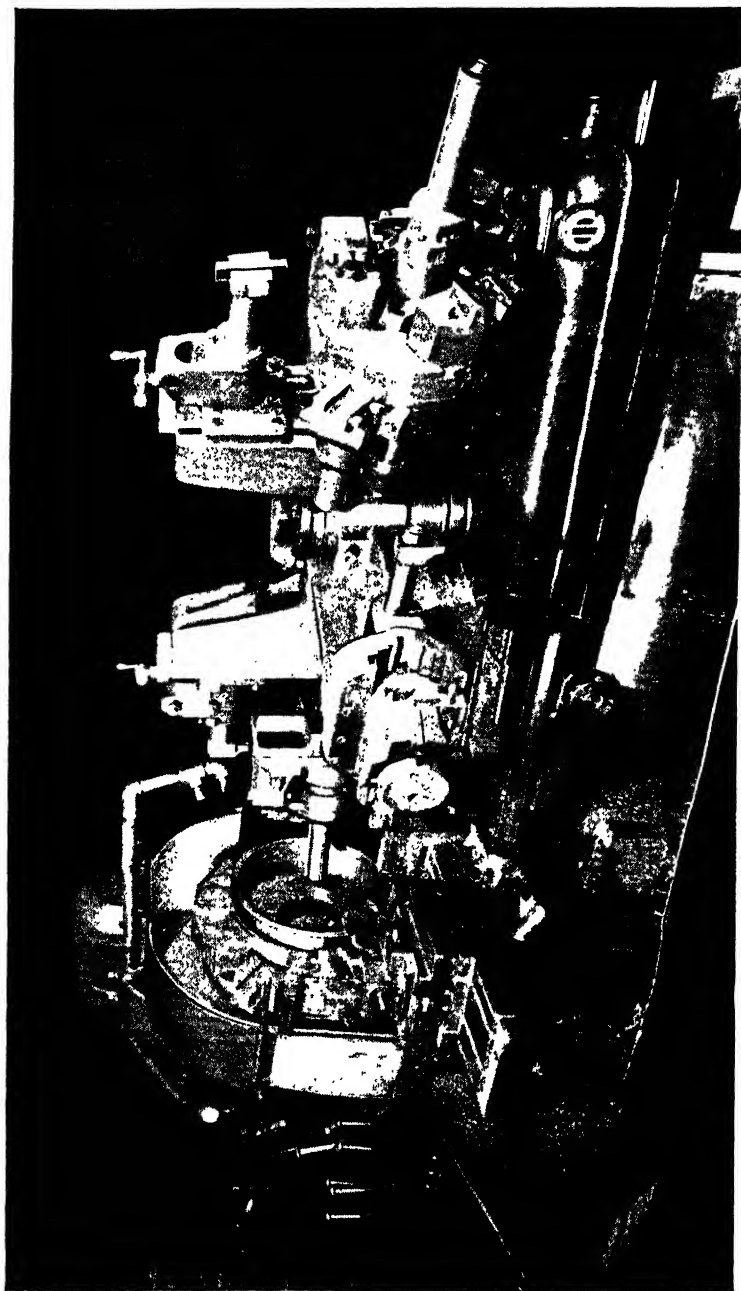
Automatic Tooling up for the Complete Machining of Large Brake-drums
